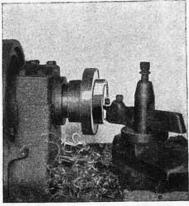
Manufacturing Gear Blanks on 16-inch Lathe
